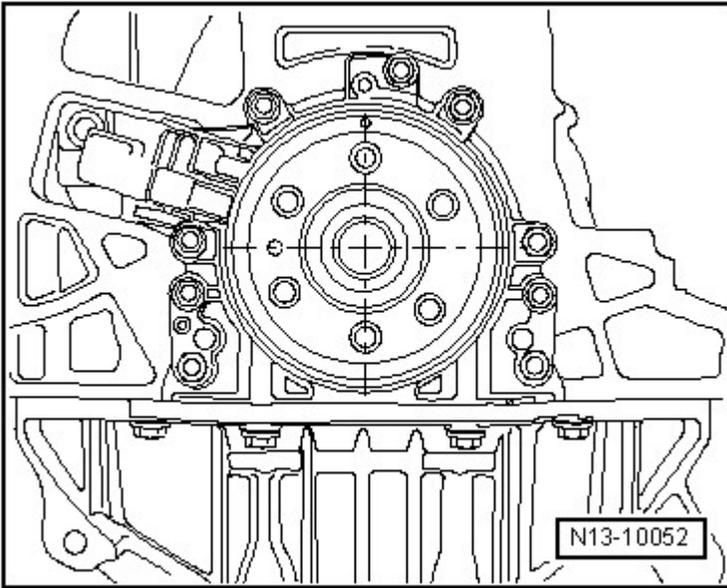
Identifying Crankshaft Rotated To Top Dead Center (TDC) For Cylinder 1
